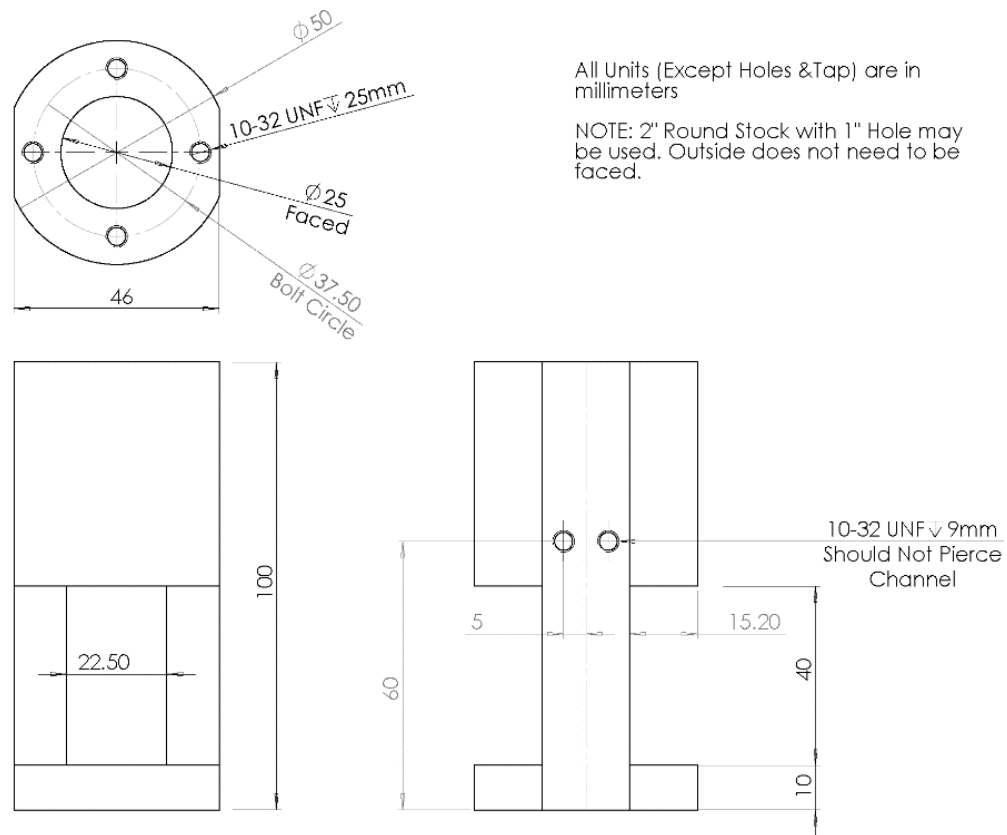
CAD Drawing of the Puncture Rig Setup Base
